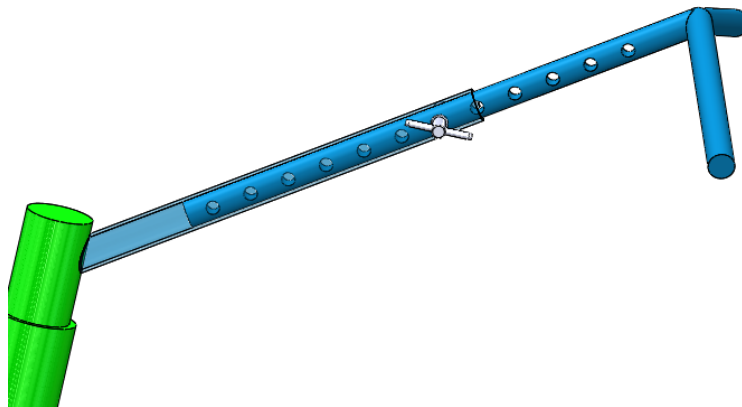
Final handlebar adjustment mechanism design; outer bar shown as transparent for clarity – will be solid metal in final design
